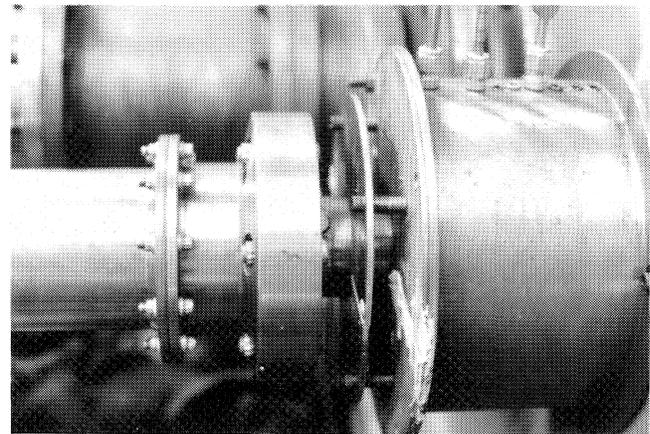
Baffle Plate Between End of Coupling and Face of Machine.
